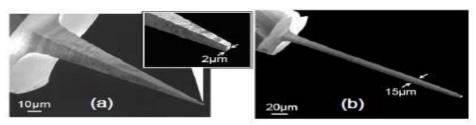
Overviews of produced micro-tools under optimum machining conditions: (a) Ultra precise tool (b) Extremely large aspect ratio micro-tool [10].
